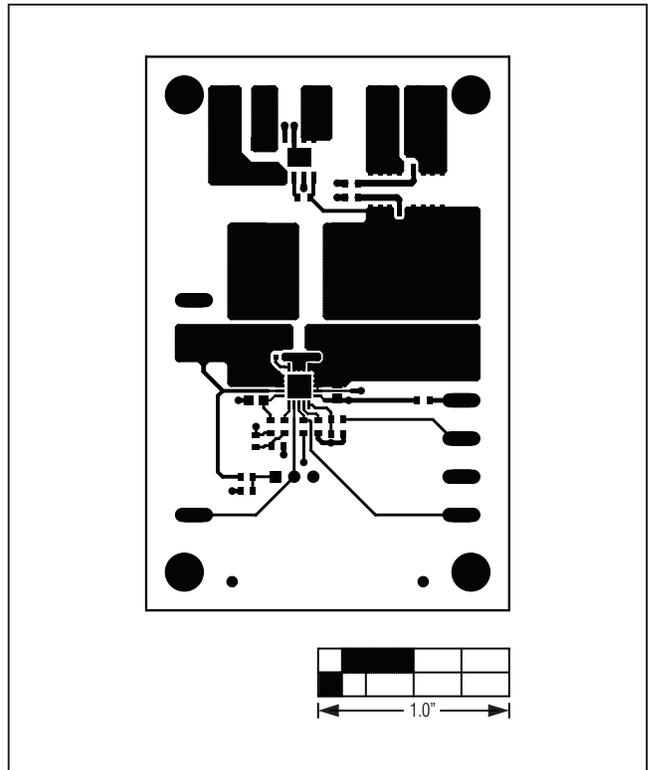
MAX17512 EV Kit PCB Layout—Component Side
